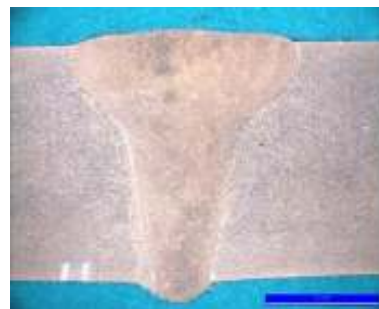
LBW seam. Test 9, double run Castasil®-37.
